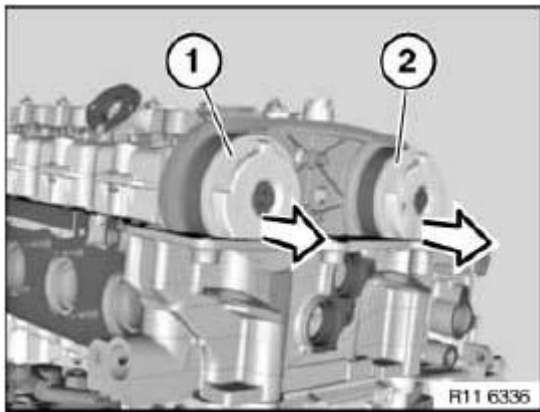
Identifying Engine Inlet And Exhaust Adjustment Unit
